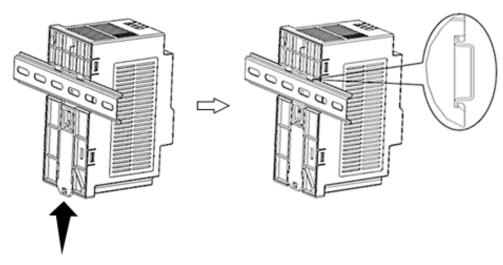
DIN rail mounting scenario 1 - Locking the DIN rail
